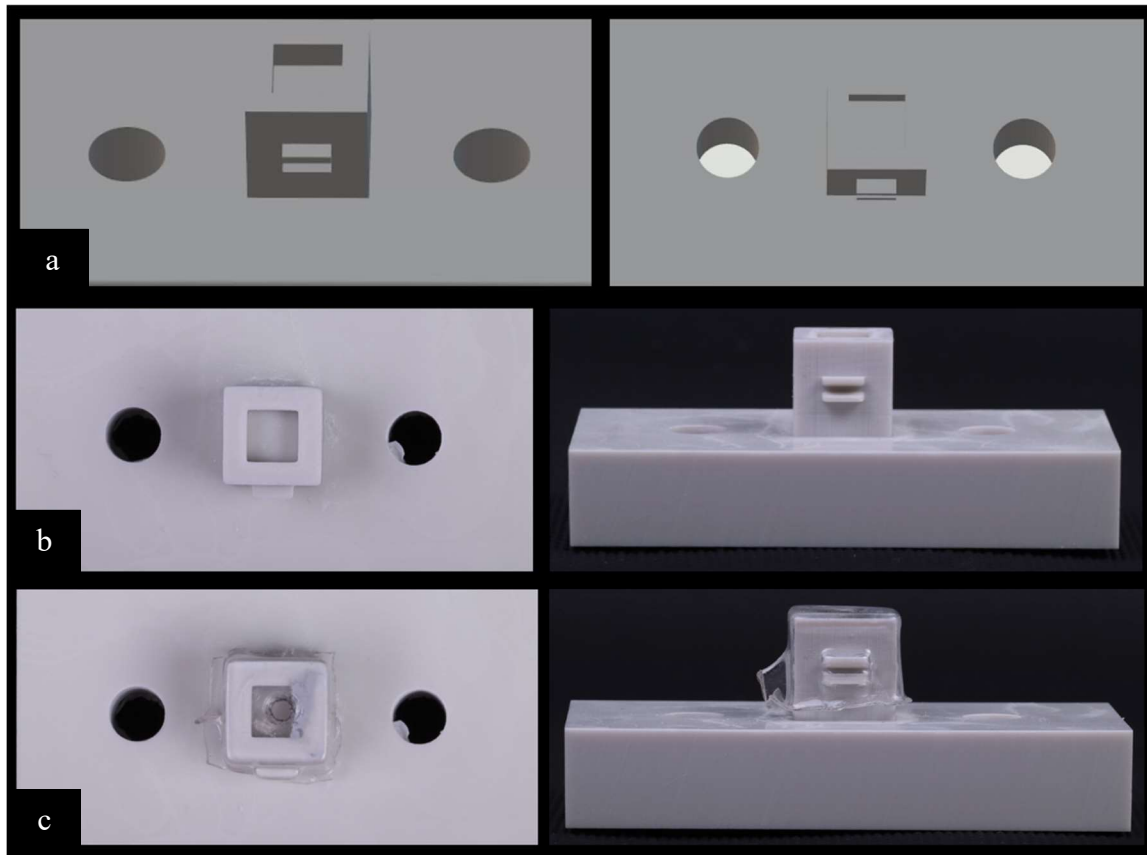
a) CAD model b) 3D printed resin model c) Model with trimmed vacuum-formed Zendura Flex aligner with screw access hole
